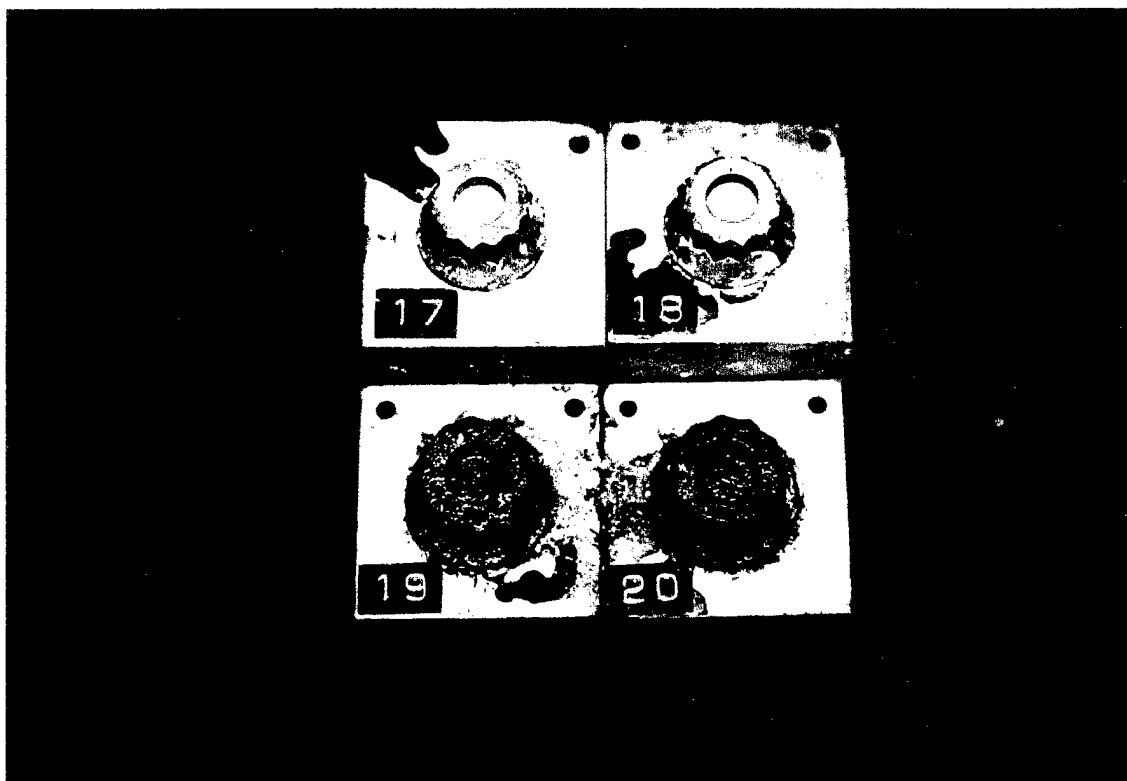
H11 Chromium Hot Work Tool Steel Bolt Heads With IVD Al Coating After 44 Days of Salt Spray. Reduced 25%.
